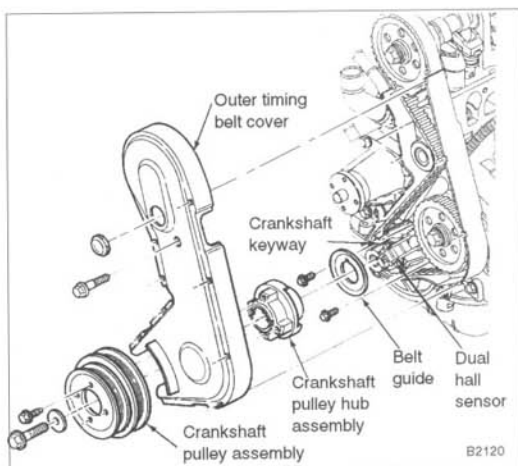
Dual Hall sensor is located on the crankshaft under the outer timing belt cover—2.3L DP. Two rotary vane cups are mounted on the damper, one for each of the two Hall-effect sensors.
